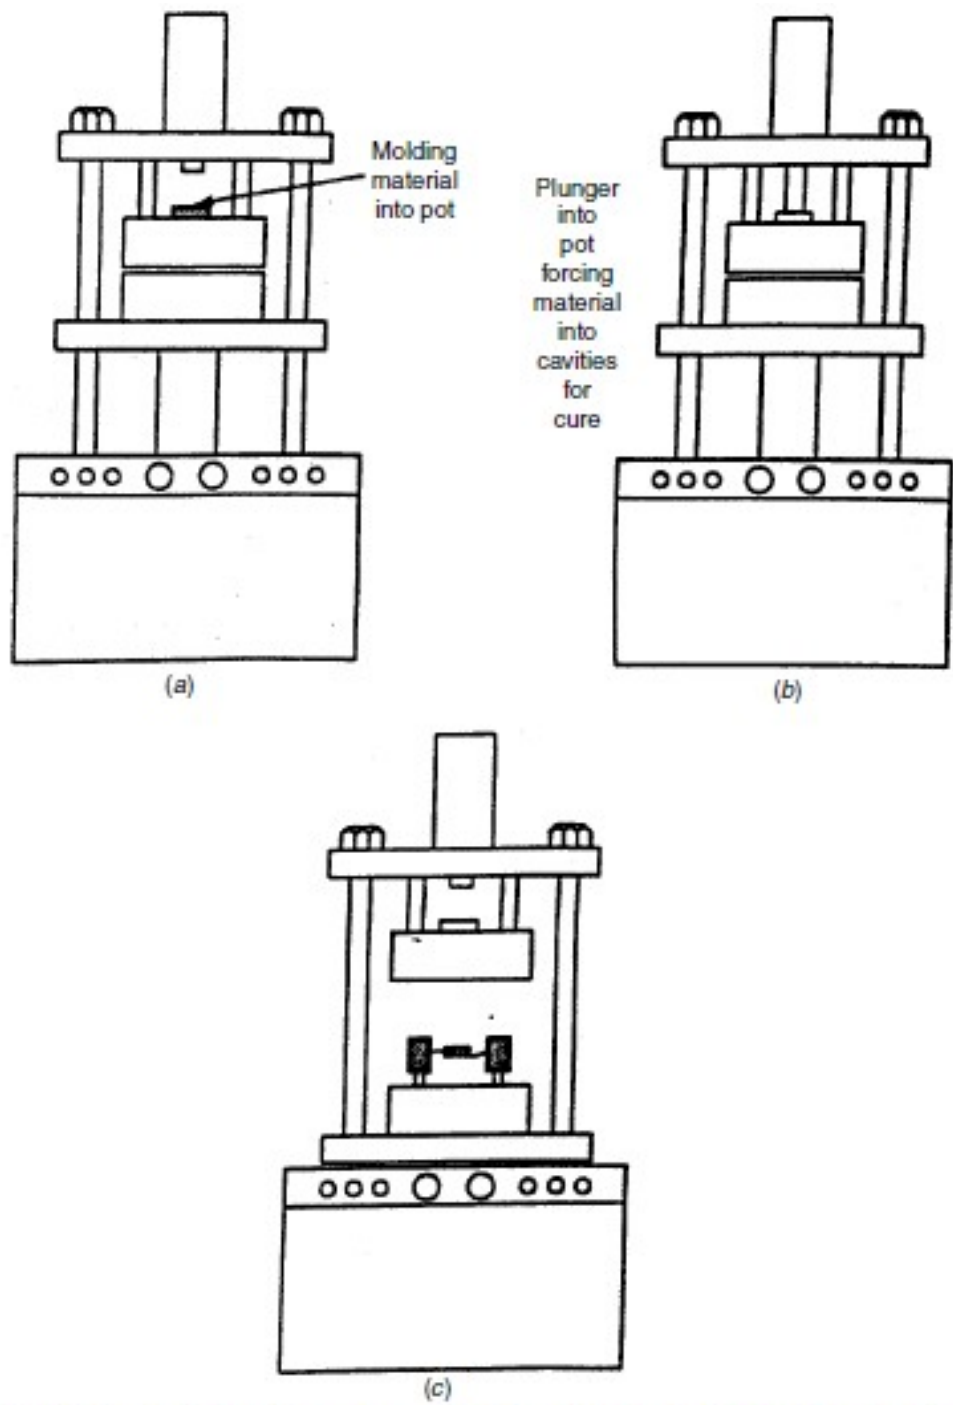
Transfer molding sequences: (a) the mold is closed and material is placed in the pot; (b) the plunger descends into the pot, causing material to melt and flow through runners into cavities; (c) after cure, the press opens, the plunger retracts, and parts are ejected with cull and runners.
